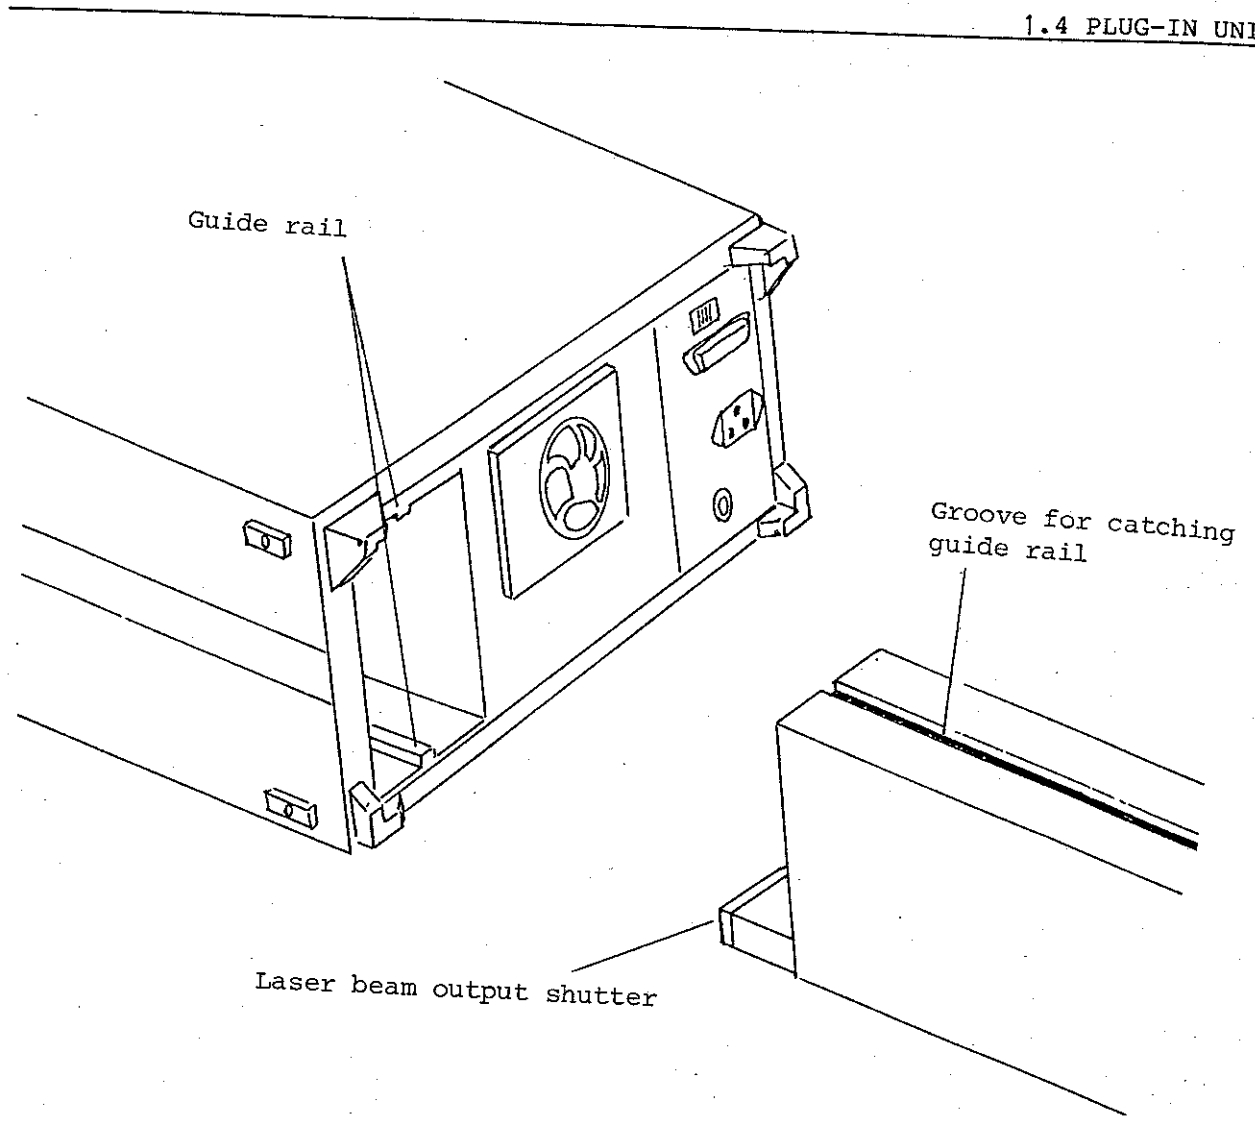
Assembling and Disassembling a Plug-in Unit
